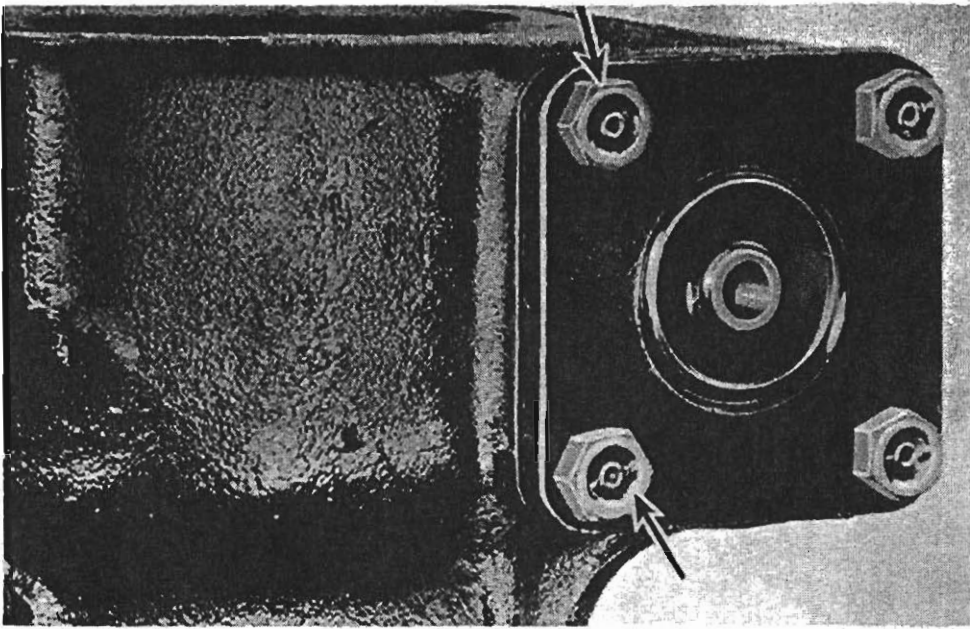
The Threads of the Two Screws Indicated Should Be Coated with Sealing Compound.
